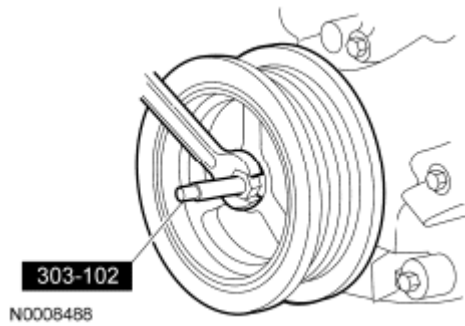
Installing Crankshaft Pulley Using Crankshaft Vibration Damper Installer
